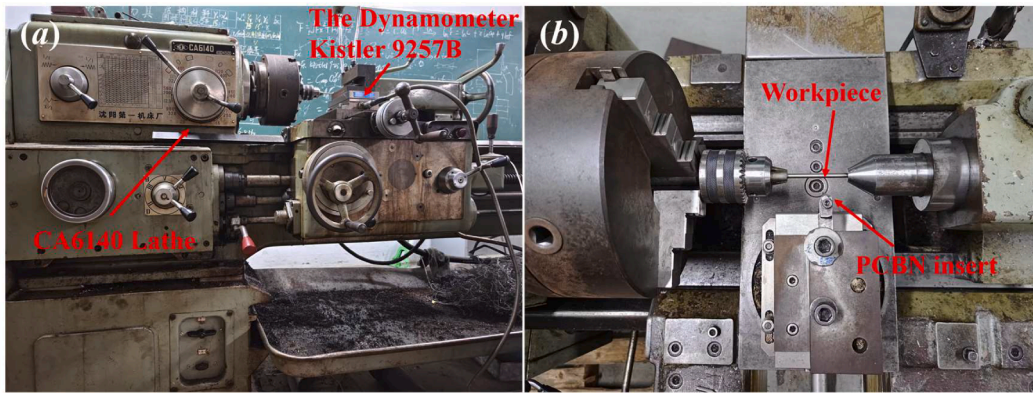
(a) The experimental setup for machining, and (b) the installation of workpiece and cutting tool.
